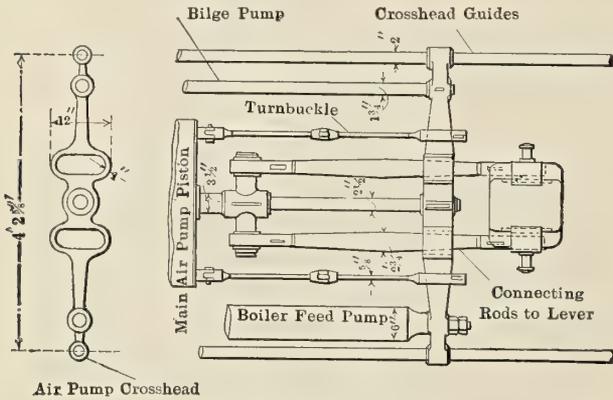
PLAN OF MAIN AIR PUMP CROSSHEAD, WITH BOILER FEED AND BILGE PUMPS ATTACHED
